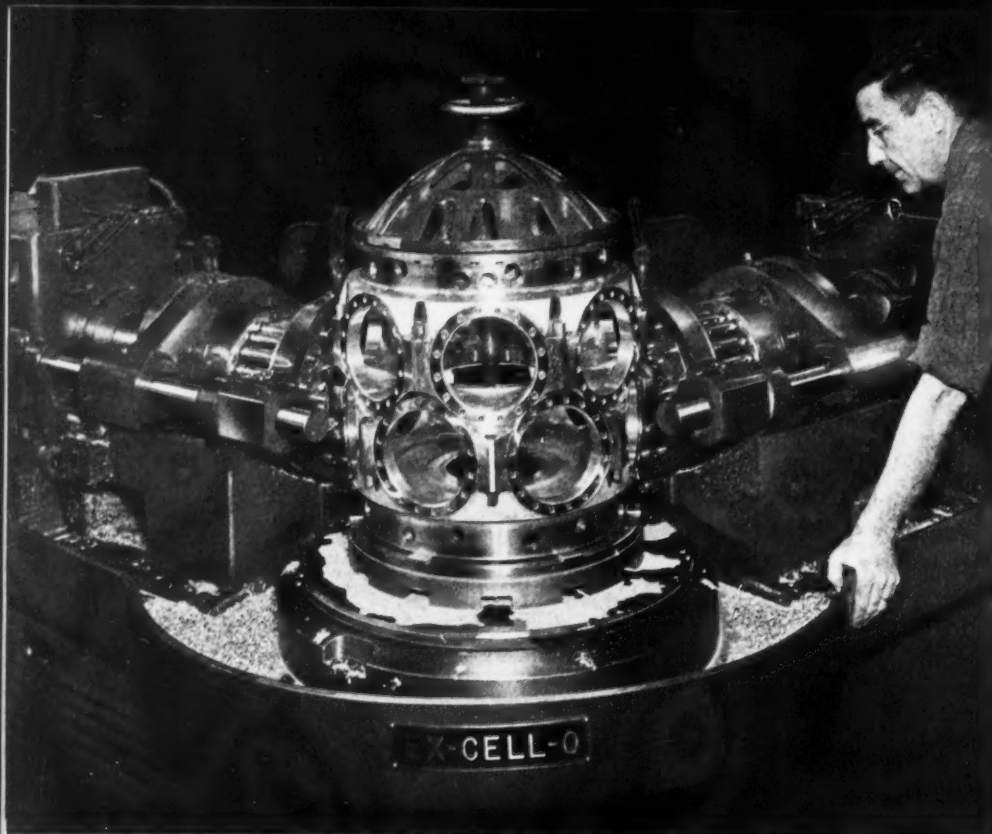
Duplex Machine that Drills, Reams, Countersinks, and Chamfers All Holes around Crankcase Cylinder Pads
